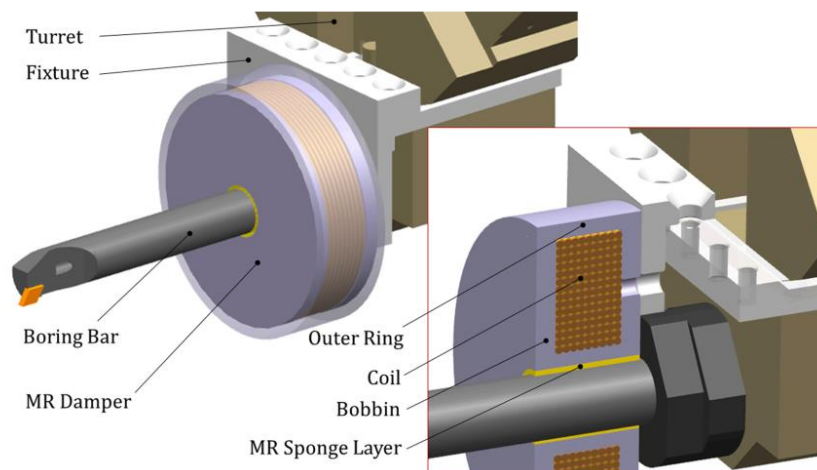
CAD model of MR damper mounted on a machine turret [11].
